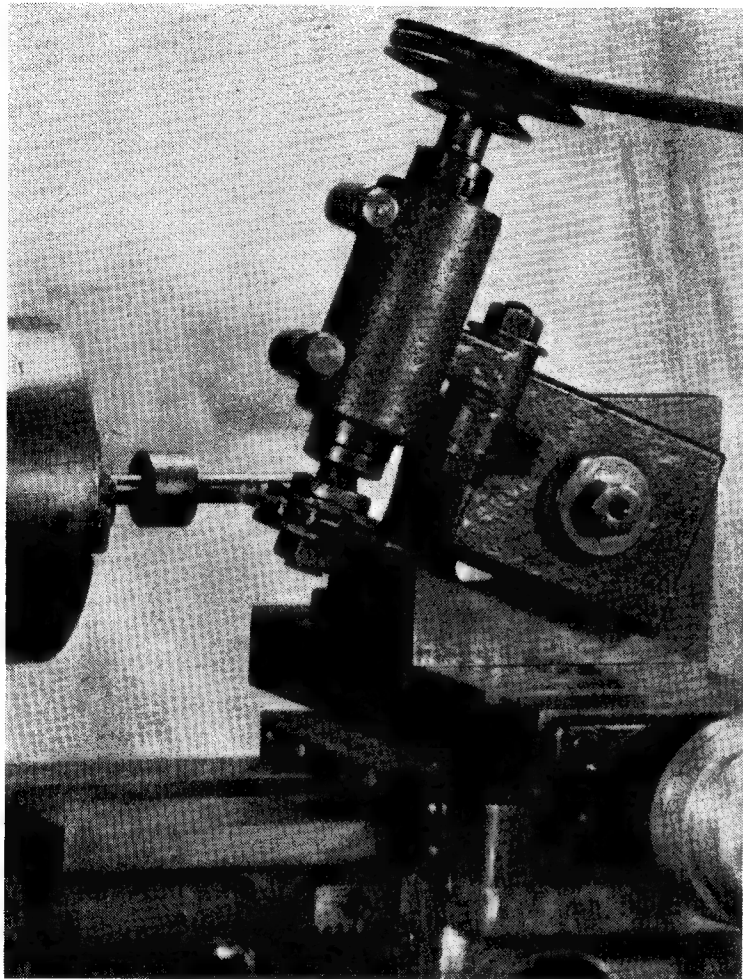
Typical cutter set-up for cutting helical gearing. The cutter is inclined at the spiral angle of the gear, and depth of cut is controlled by movement of the cross-slide
